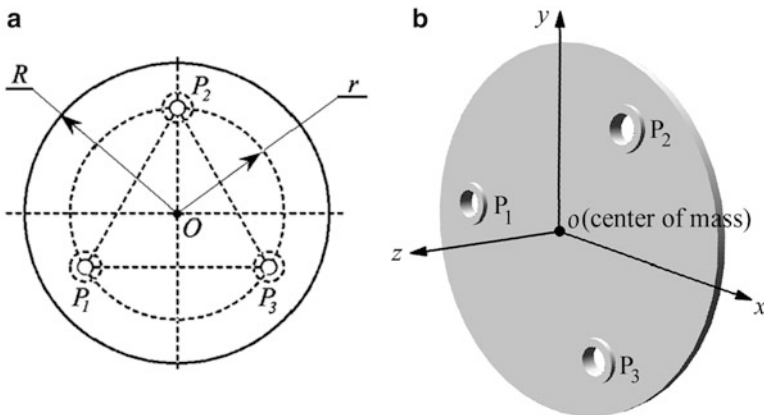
A special shape of the moving platform: (a) drawing in 2D; (b) CAD model in 3D
